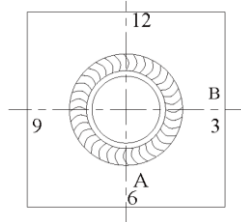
Cutting Position of Macro Sections of Pipe-to-Plate Assembly
